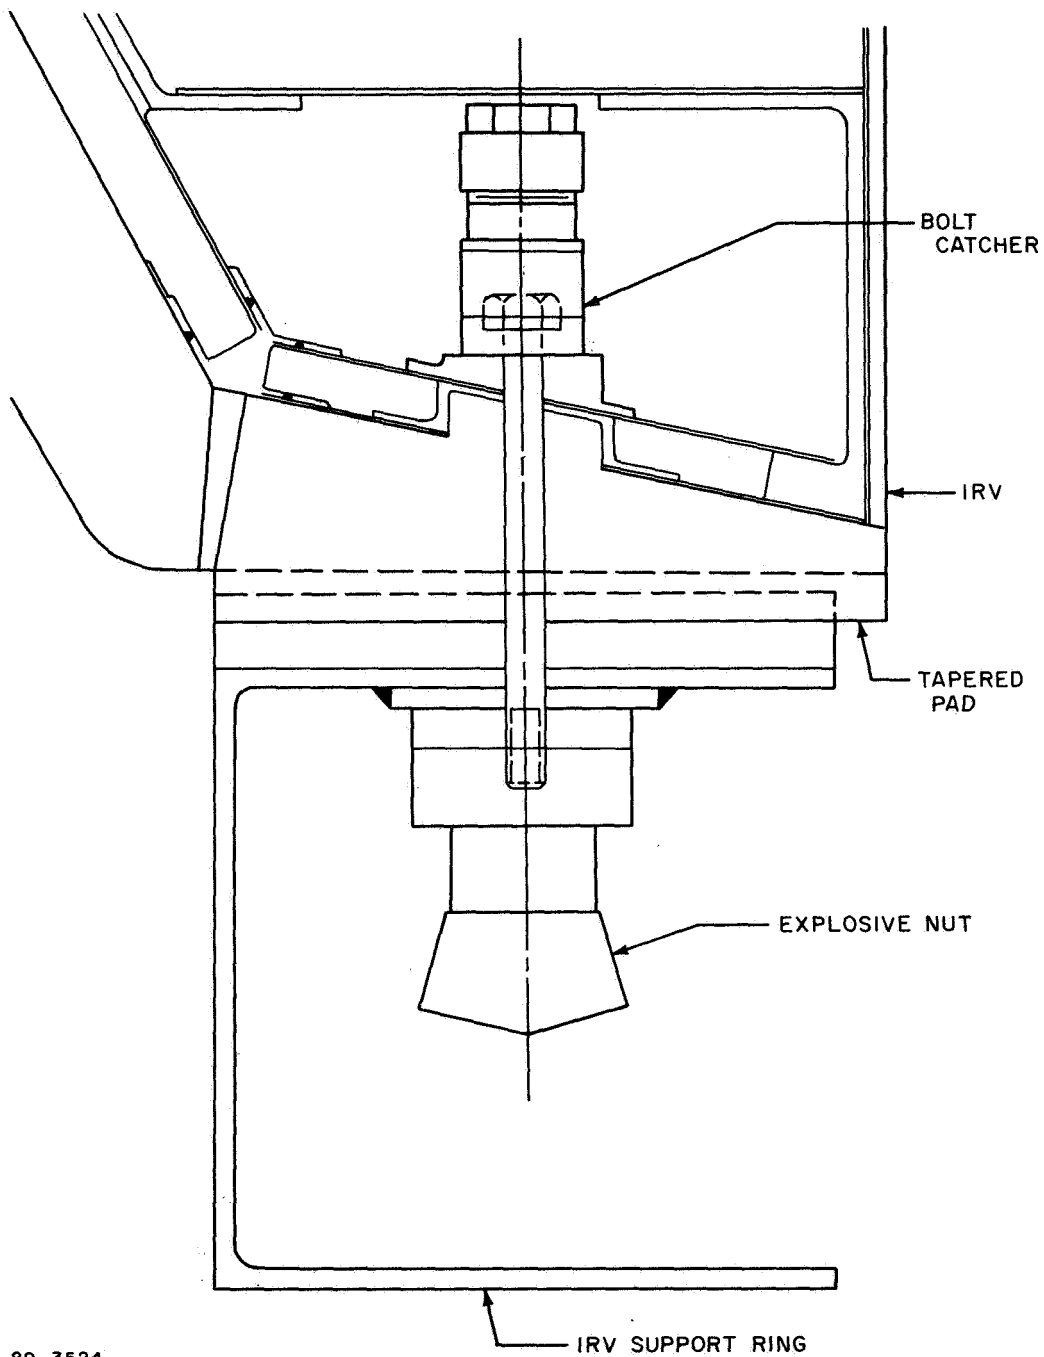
IRV/SUPPORT RING EXPLOSIVE NUT ASSEMBLY
